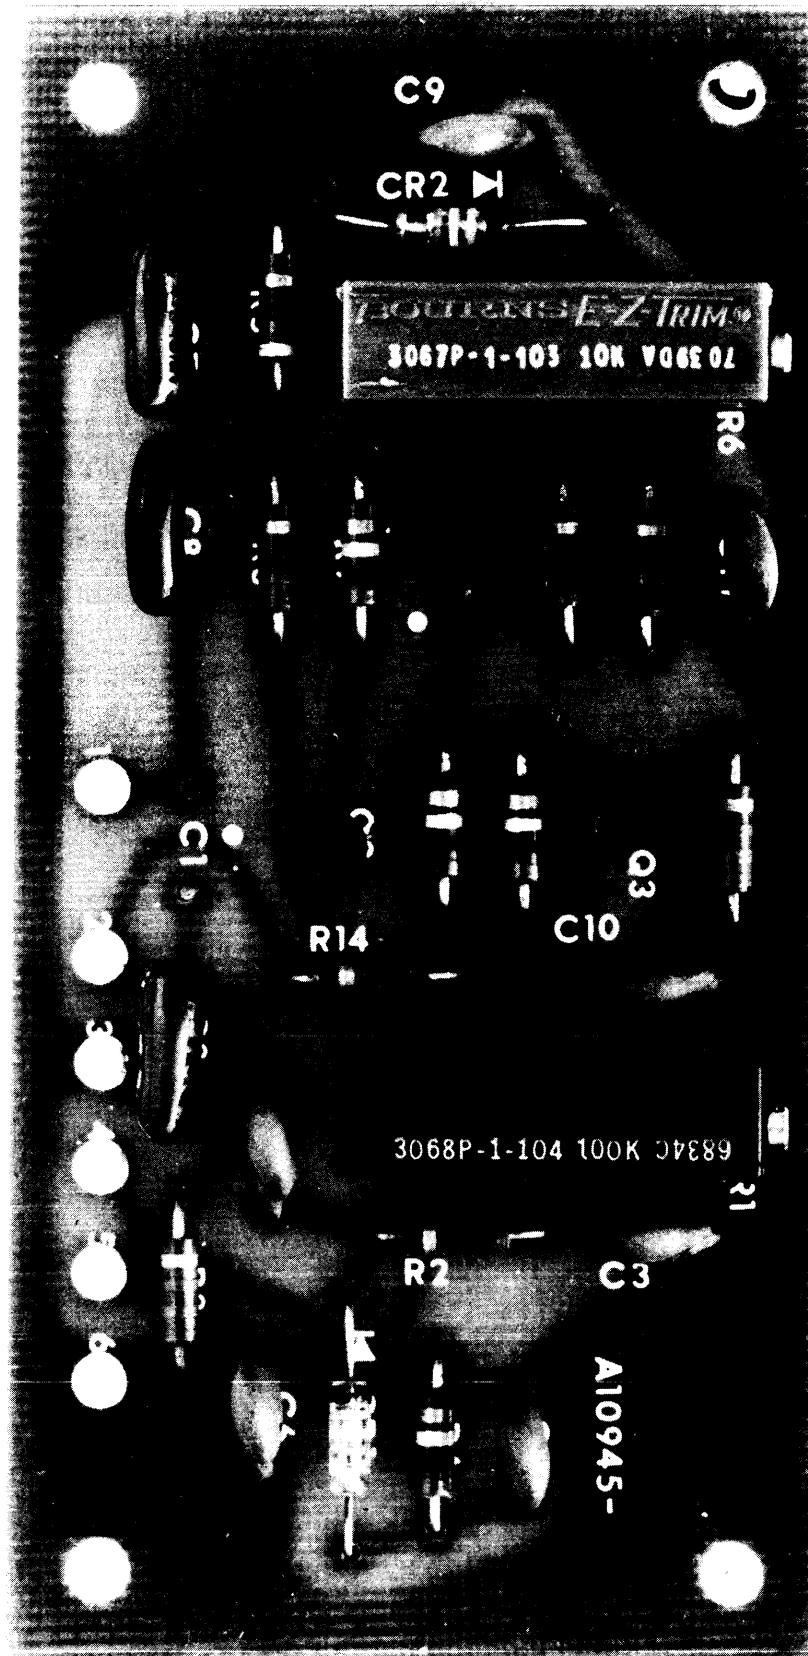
ALDC & MONITOR ASSEMBLY, A10945, MTR-100A
